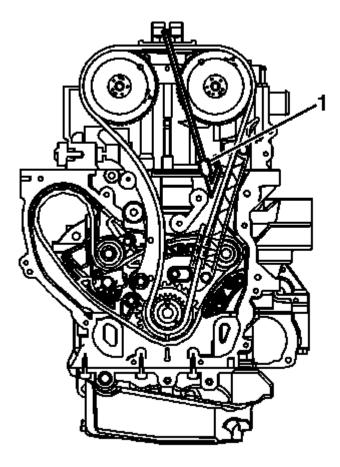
Timing Chain And Chain Retention Tool Courtesy of GENERAL MOTORS COMPANY
